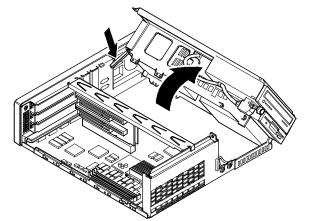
9 Opening the Device Bay & Power Supply Subassembly
